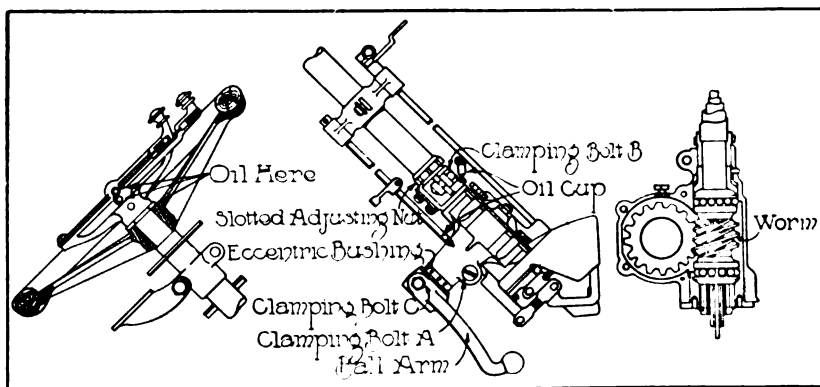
Components Utilized in Eliminating Lost Motion from Steering Gear.
